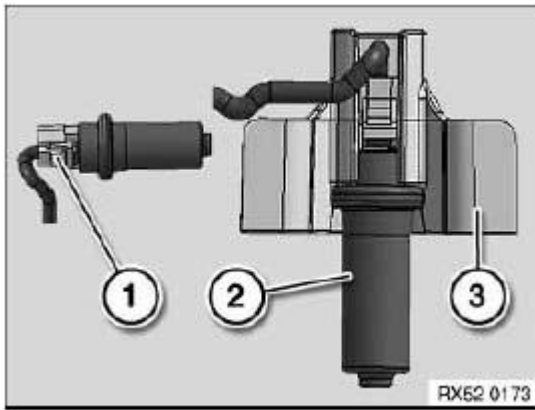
Identifying Plug, Pyroactivator And Mounting
